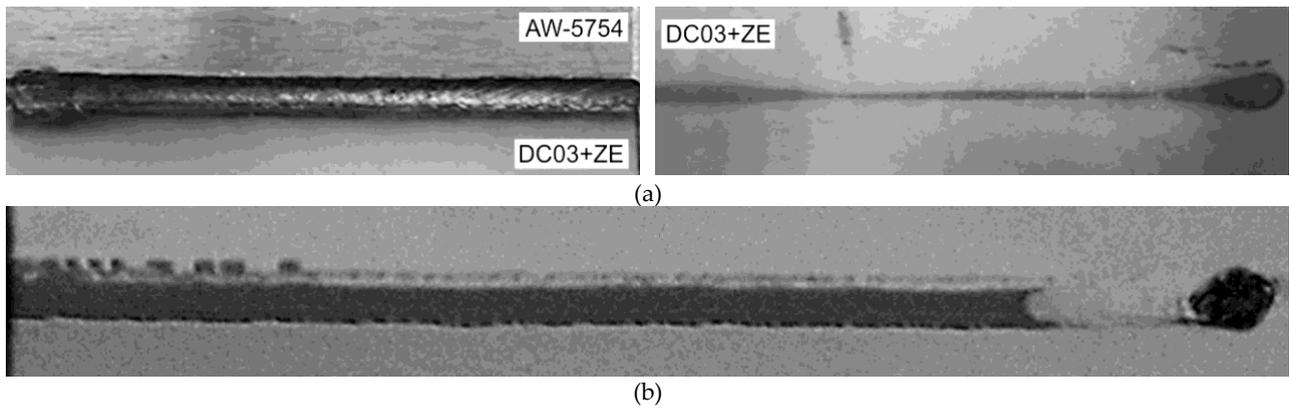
Braze welded joint steel DC03 + aluminum AW-5754, brazing consumable AlSi5: a) both sides of the joint; b) C-scan of the joint
